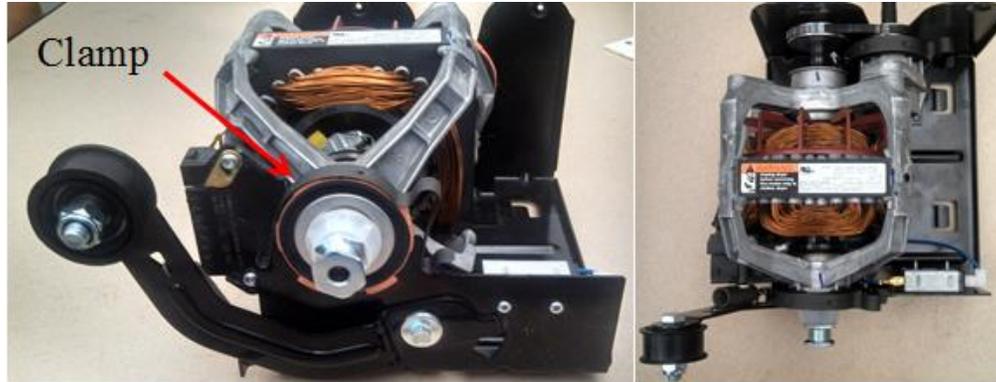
The motor system from the rear, left, and from the top, right, consisting of the motor, its casing, the shaft, and the bracket.
